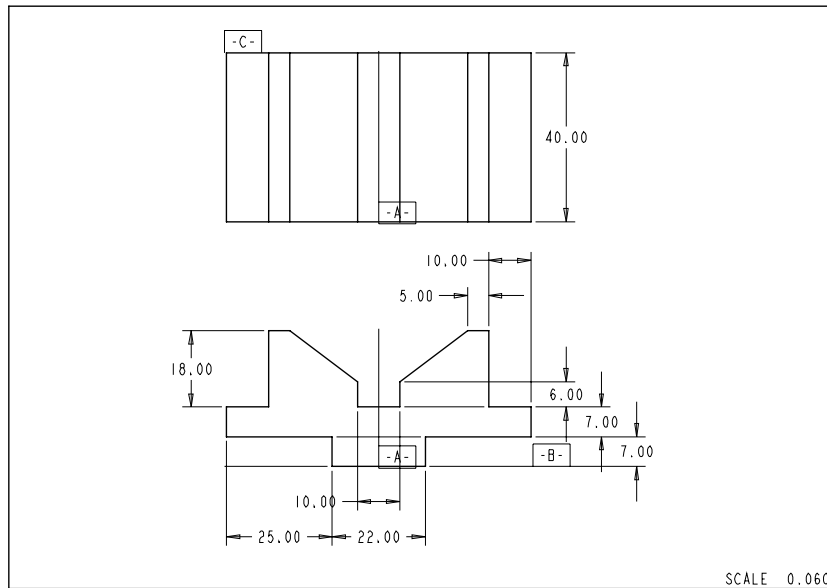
Top and the front views of the model with the dimensions and datum planes
